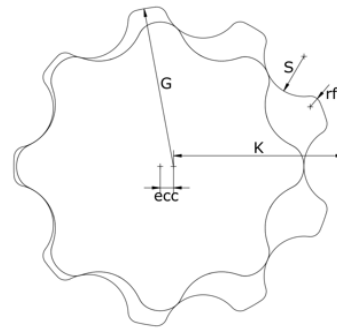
Gears dimensions;  $z$ : number of teeth on external gear,  $H$ : gears thickness [mm],  $\text{rotinit}$  = shaft initial angle [degree]
